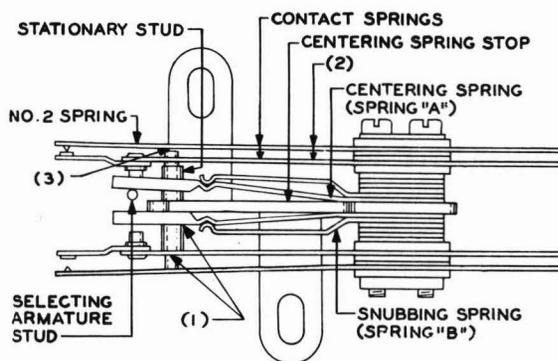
Fig. M — Selecting Off-Normal Spring Assembly With Selecting Unit Operated
